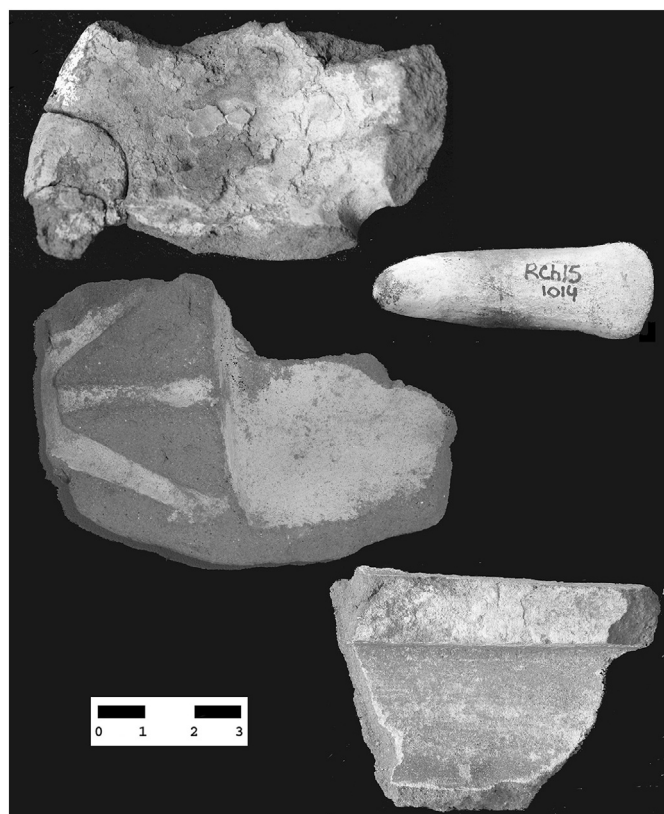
a) 'Perforated' crucible b) Plug c) Closed mould of small bell, d) Open mould of flat object.
